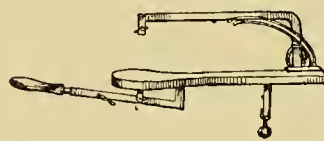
ECLIPSE HAND MACHINE FOR FRET SAWING.
